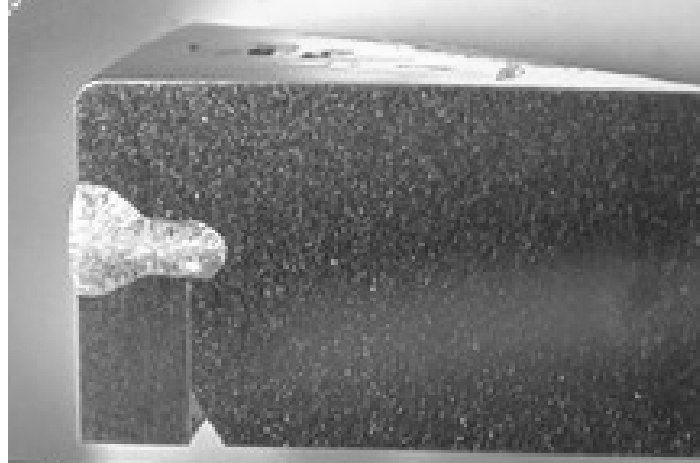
Section of closure weld of can 2 by laser process.
